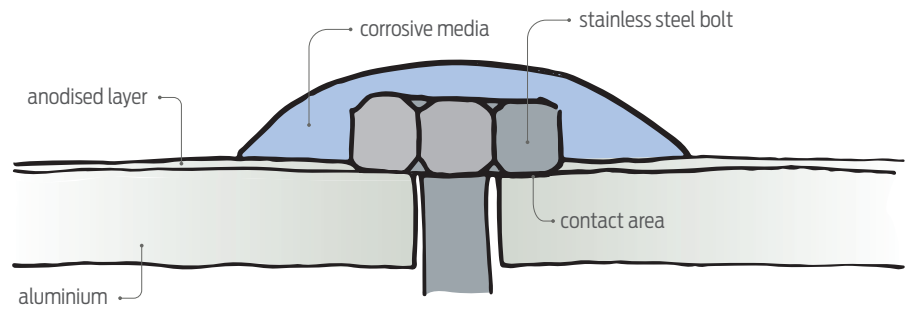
Contact between stainless steel fastener and partially damaged anodised aluminium sheet.
